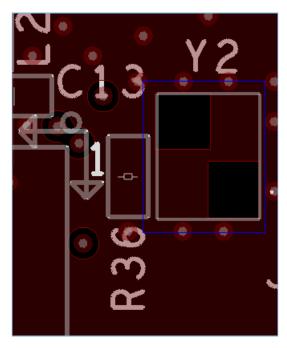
Openings on PCB pad for clock crystal of GR5515RGBD
